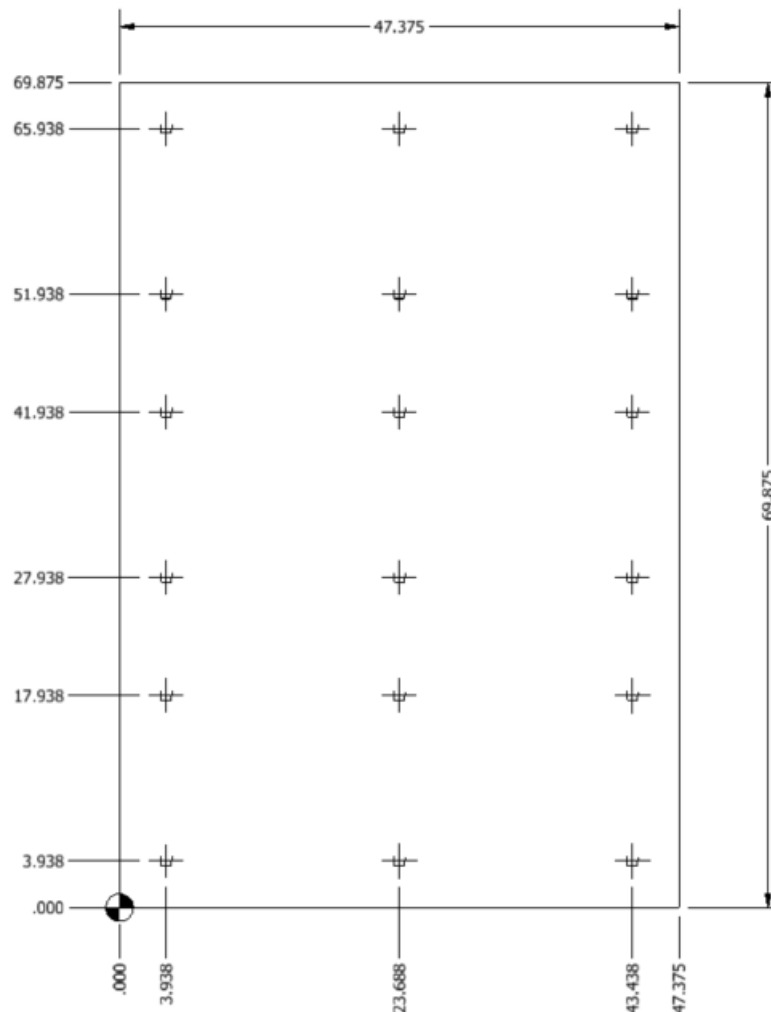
2D drawing of a sheet metal part with ordinate dimensions and origin indicator
